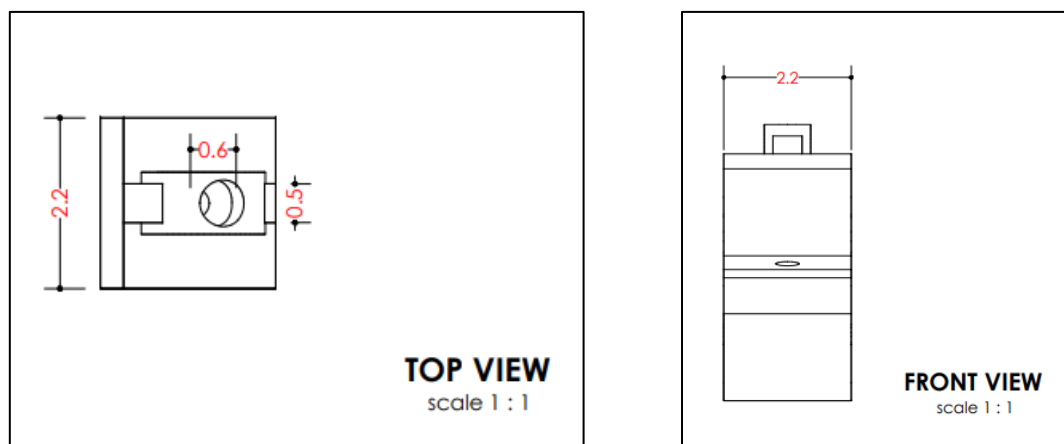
Figure of top view (a) on the left and front view (b) on the right of lockout breaker design.
